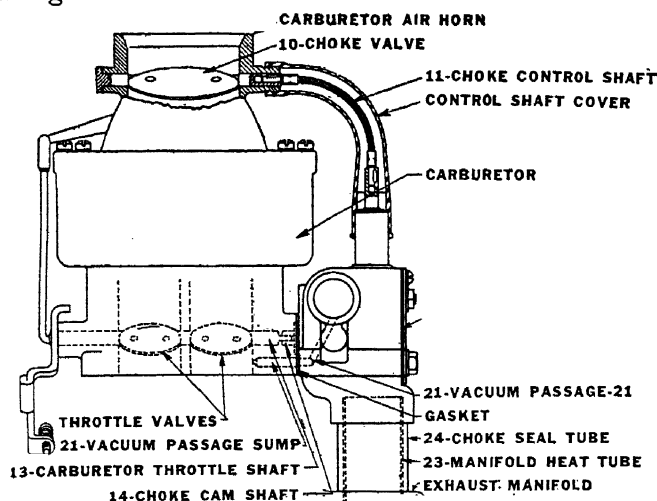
Showing Cable Operation of Air Choke Valve, in Buick Carburettor.
